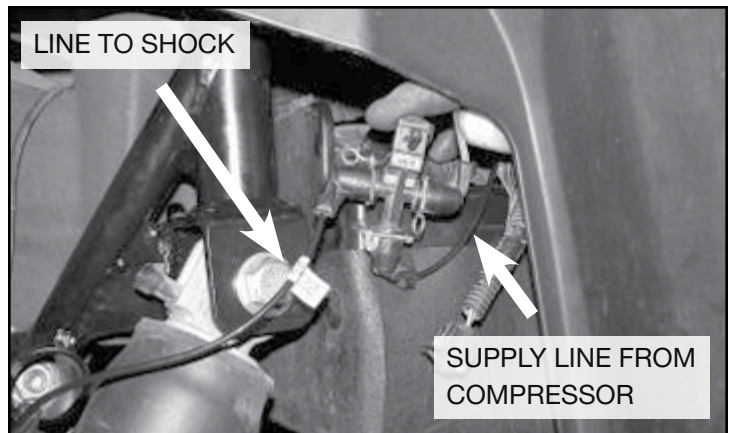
STEP 17 (NEW ROUTING SHOWN)
